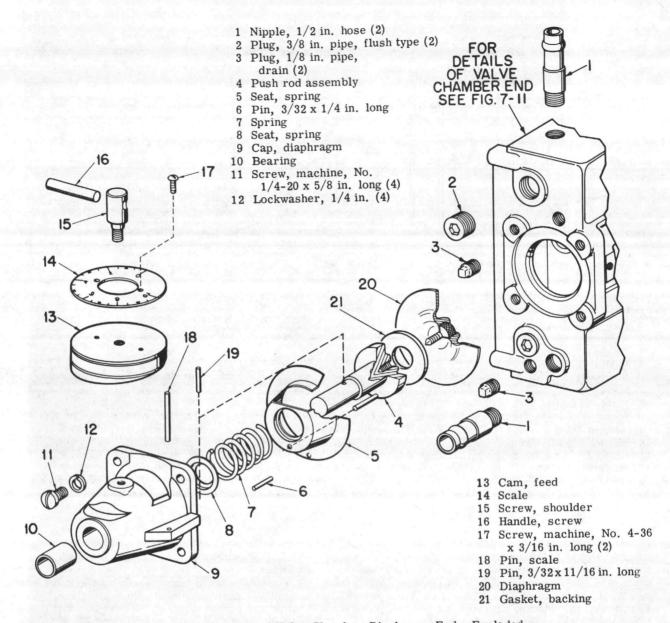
Mixing and Valve Chamber-Diaphragm End - Exploded
